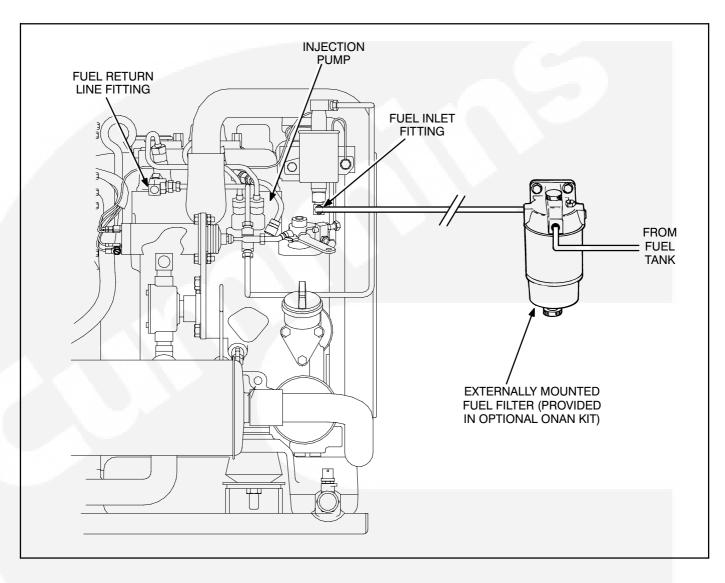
ENGINE FUEL SYSTEM COMPONENTS
